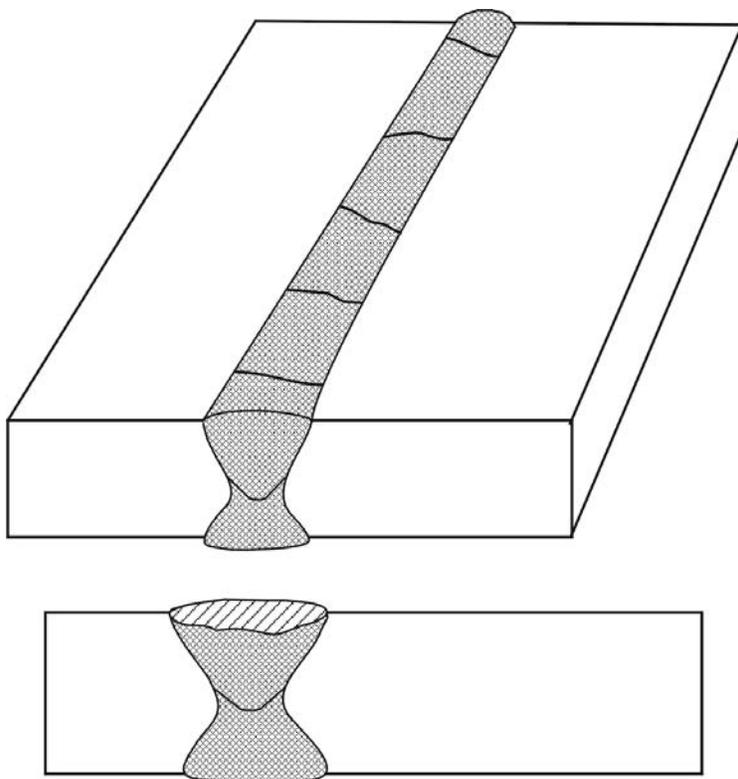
Schematic of SSC damage of a hard weld.
